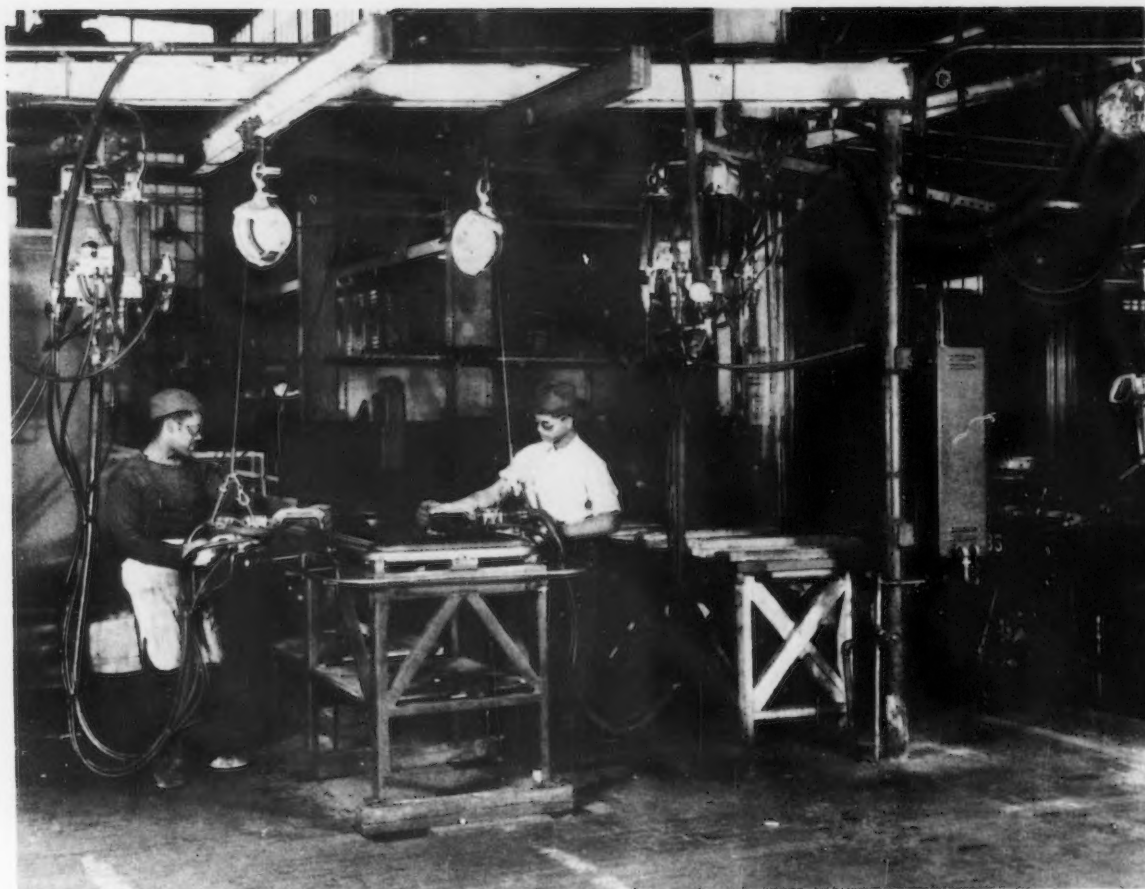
Molding is spot welded to the body angle ring by these two 50-kva air-operated gun welders. The guns are hung on spring balancers to facilitate handling.
